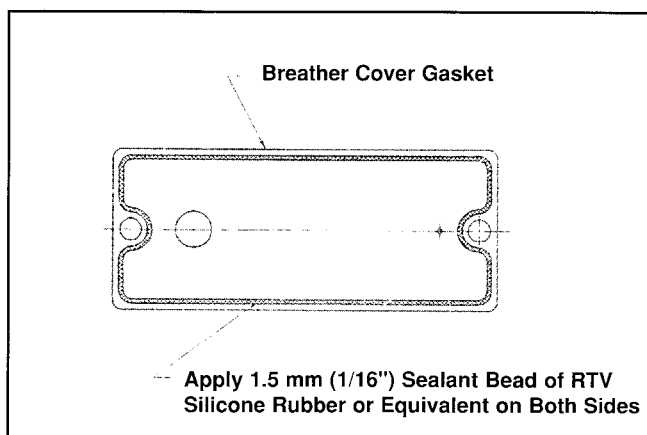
Sealant Pattern For Breather Cover Gasket.
